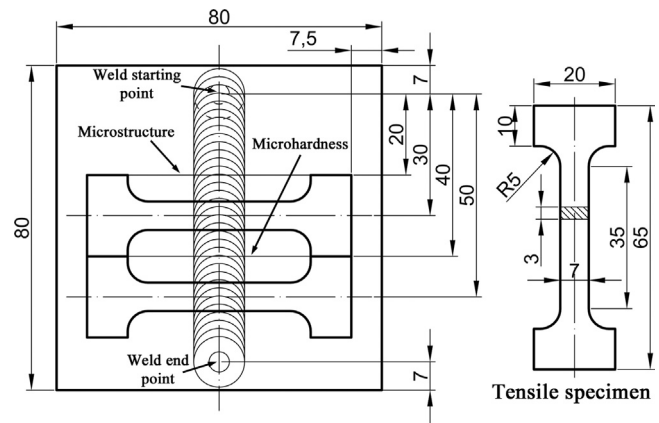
The weld and specimen dimensions. See Section 2 for details.
